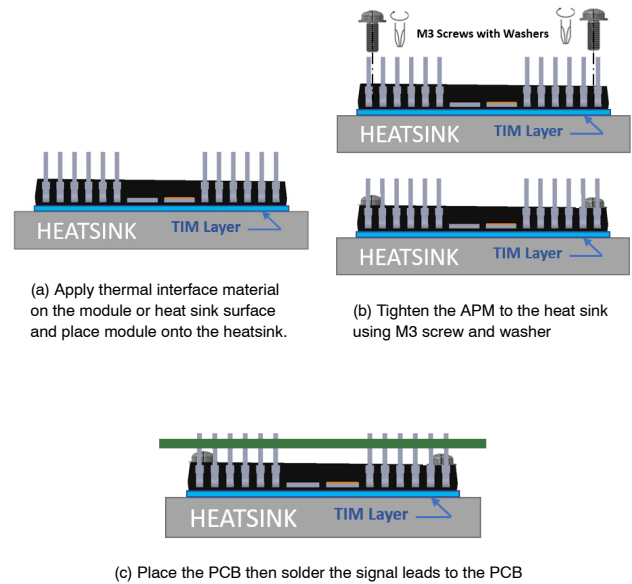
Process Flow of Soldering APM Package (When Heat Sink Mounting First)
